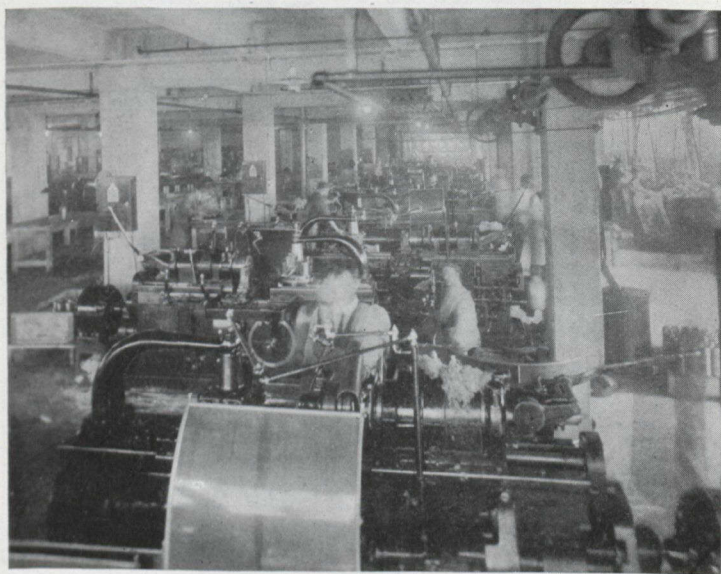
Machining Shrapnel Shells at Dominion Bridge Co., Lachine.
